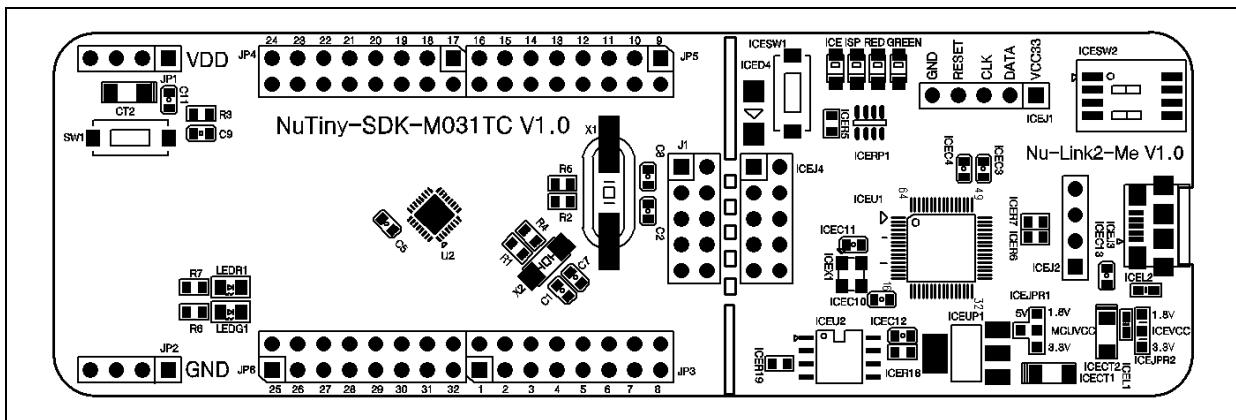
NuTiny-SDK-M031TC PCB Placement
